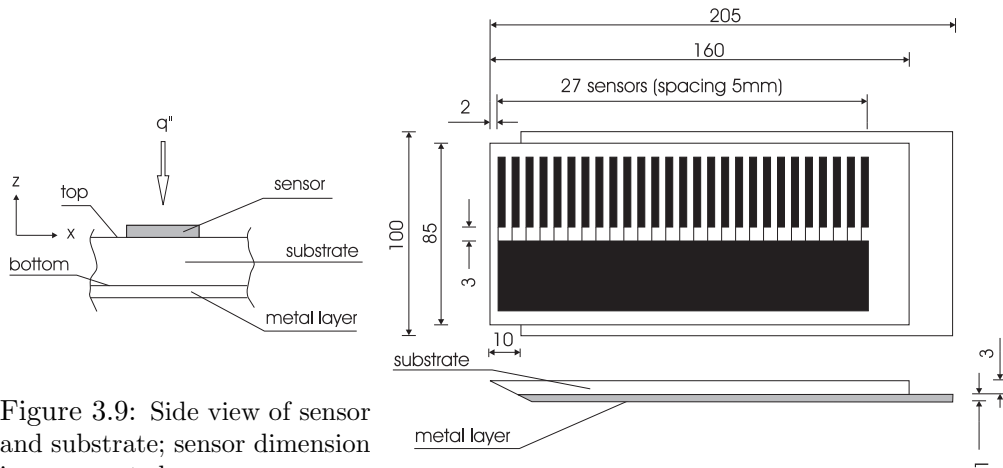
Side view of sensor and substrate; sensor dimension is exaggerated.
